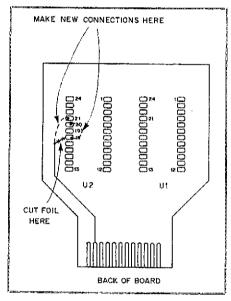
On the back or bottom side of the circuit board one foil trace must be cut and two jumpers added; see text.
